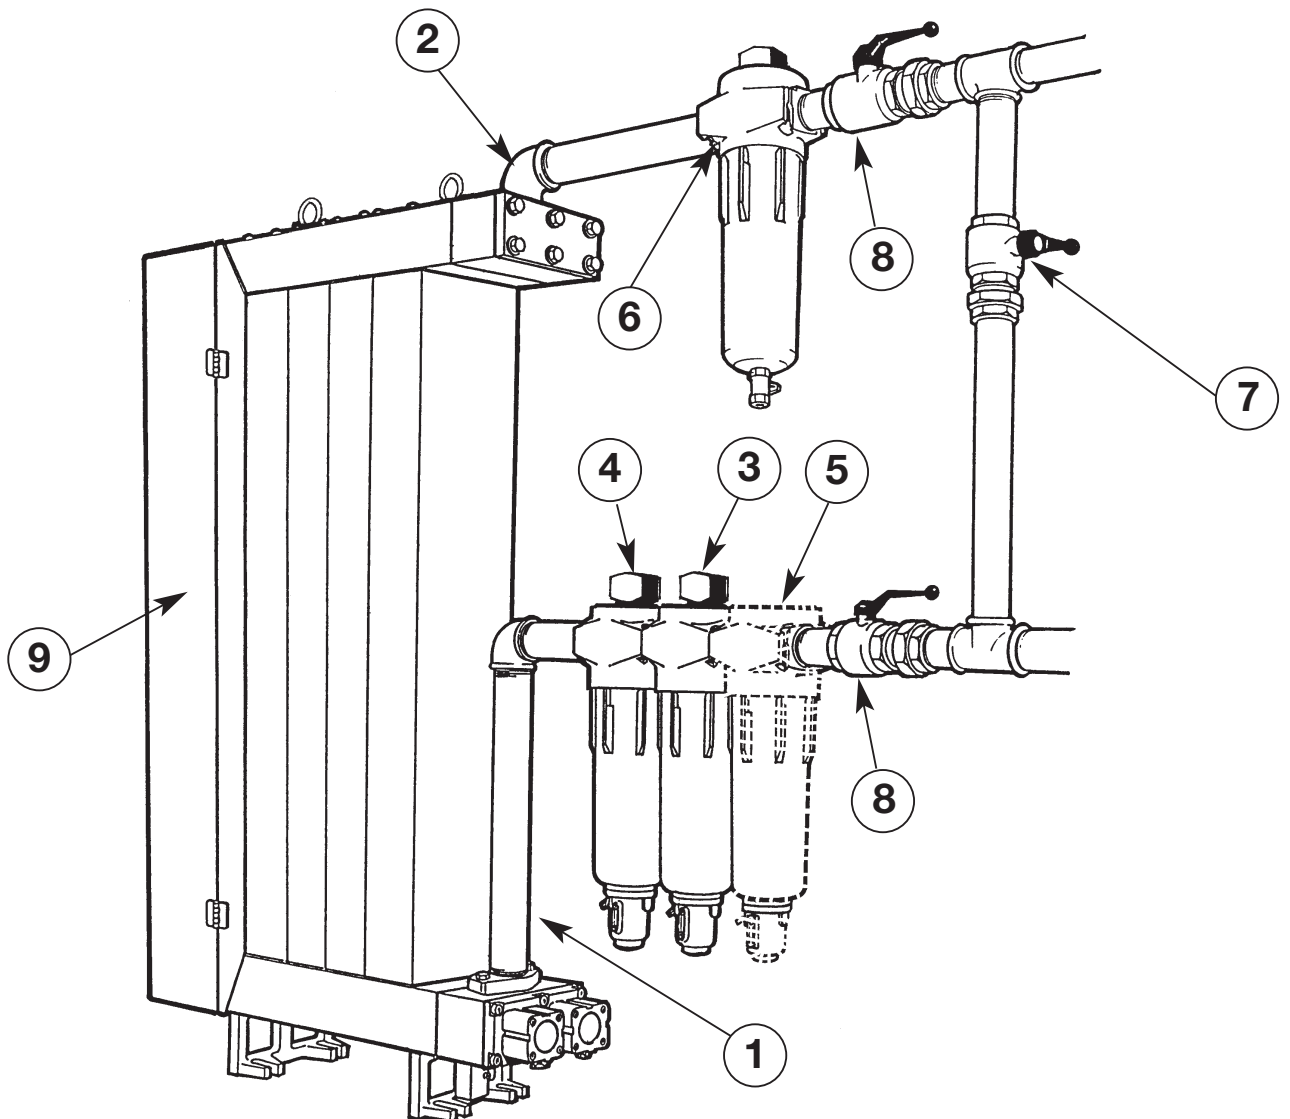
TYPICAL SINGLE BANK INSTALLATION
